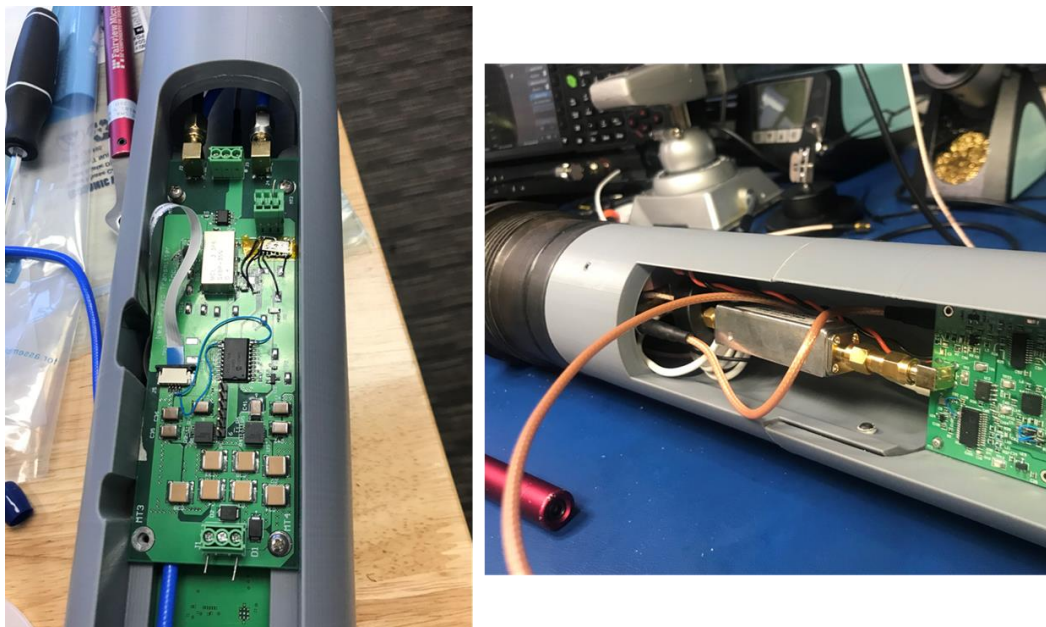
Receiver and Transmitter PCBs Mounted on Chassis and Secured to Bulkhead
